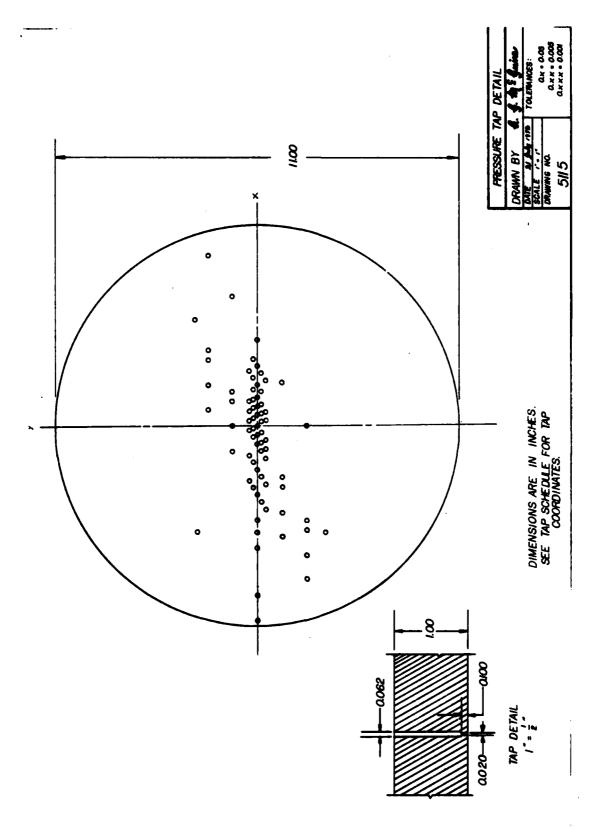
Cascade Wind Tunnel Test Section Static Pressure Tap Positions
